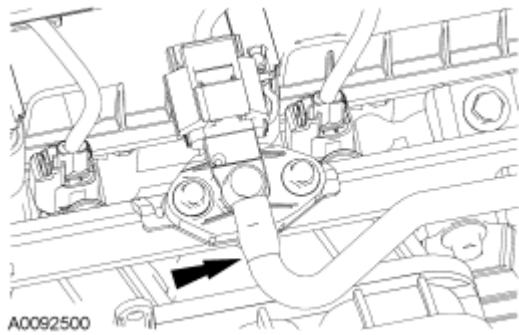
Locating Fuel Rail Pressure And Temperature Sensor Vacuum Hose
